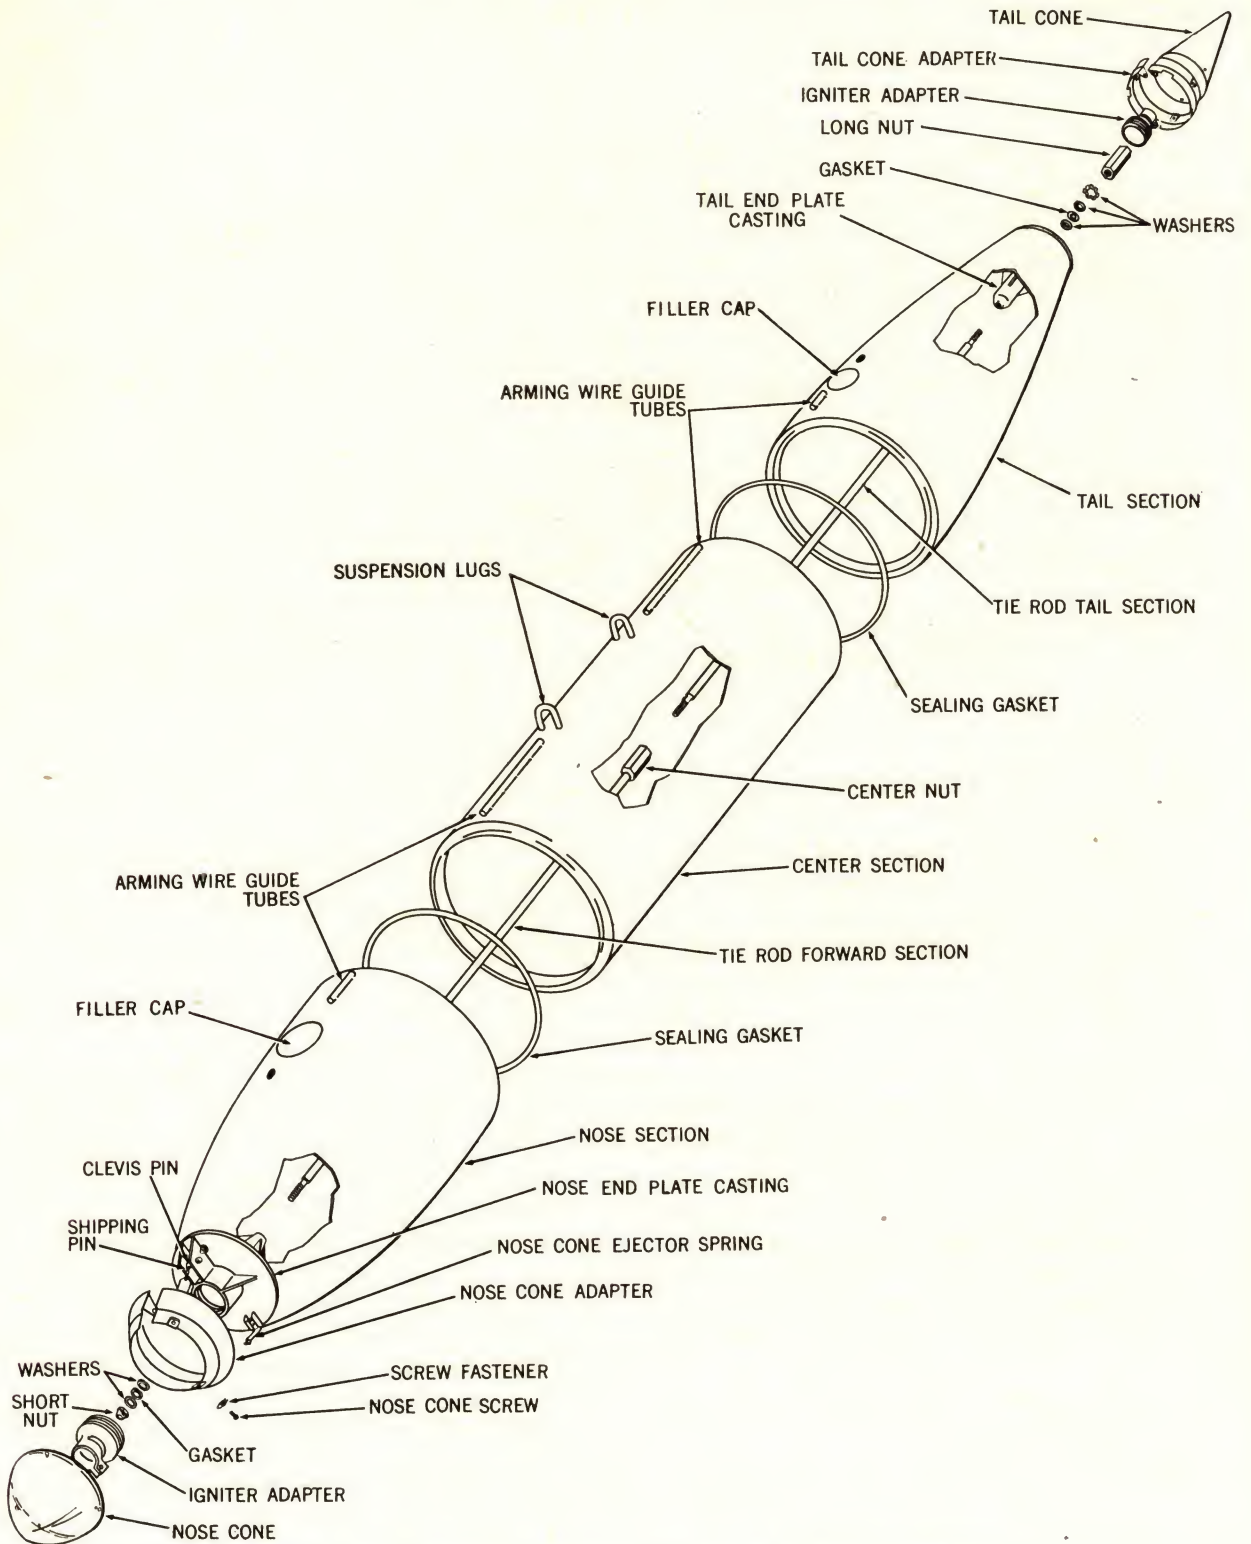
Bomb Sections, Gaskets and Tie Rods, Exploded View.
